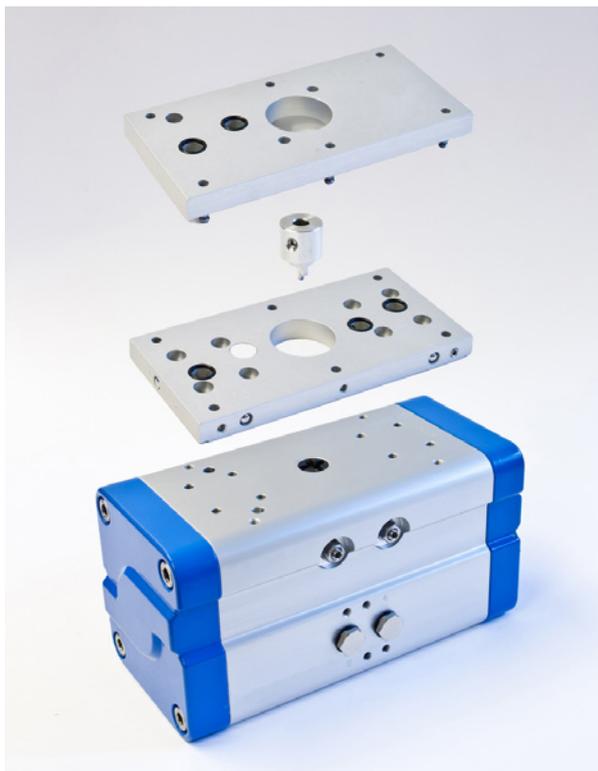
Pneumatic actuator actubar® with air-supply adapters for direct mounting onto a positioner
